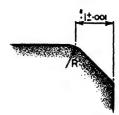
A DIMENSION THAT CANNOT BE MEASURED
